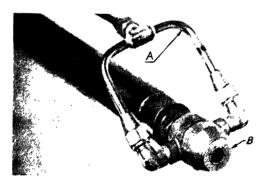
The nozzle end of a powder-type cutting torch. The U-shaped extra tubes (A) carry the powder. This tip design (B) permits adapting a regular cutting torch to powder cutting
